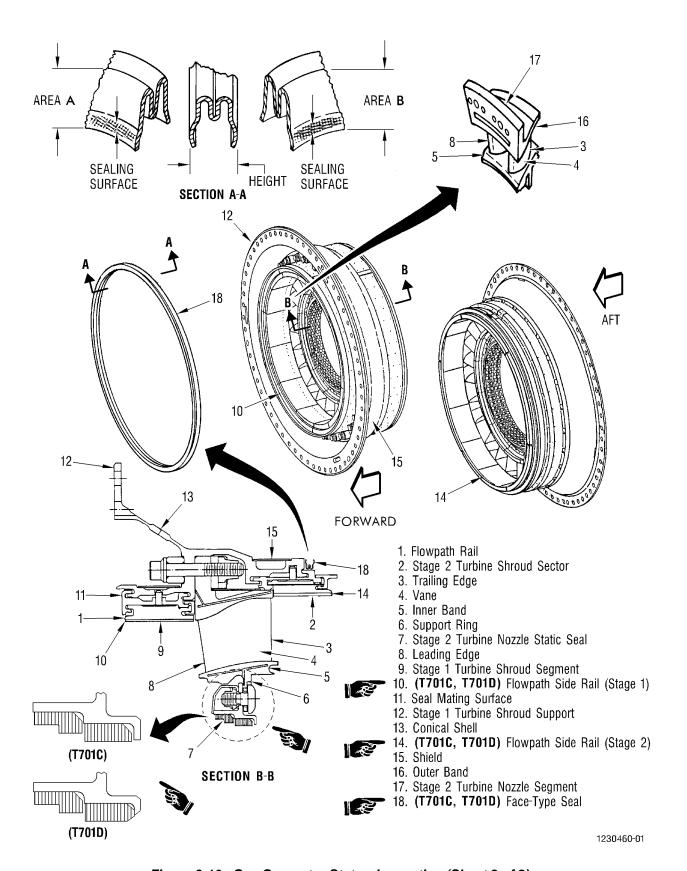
Gas Generator Stator; Inspection (Sheet 2 of 2)
